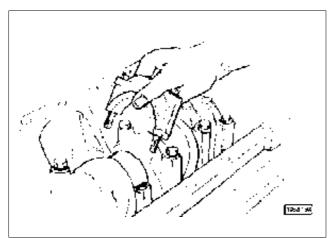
Install the intermediate crankshaft main bearing taking care the numbers stamped on the bearing correspond to those stamped on the crankcase. (Numbers should all be oriented in the same direction);
